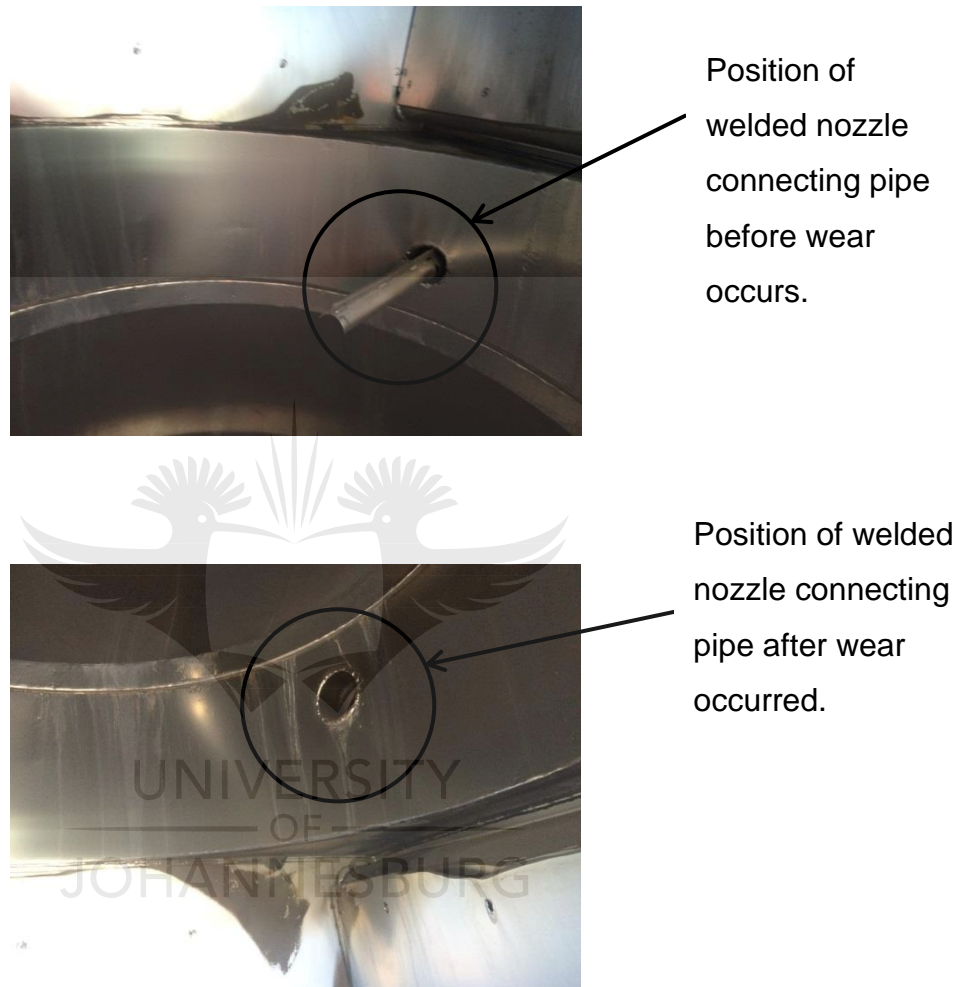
6: Picture inside the venturi chamber, on the top shows spray nozzle connecting rod and the bottom shows spray nozzle connecting rod that is worn out.
